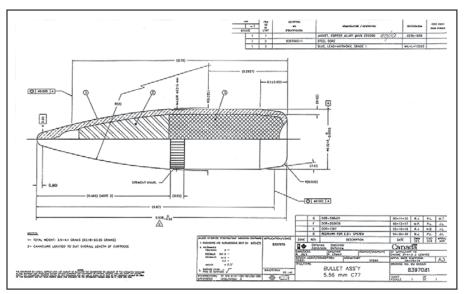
Bullet Assembly Drawing for the 5.56 mm C77 Bullet
